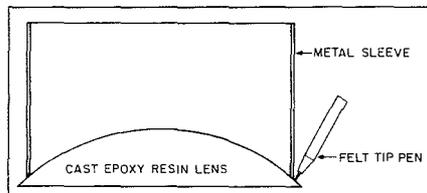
Marking the cast lens for edging. Note that the marking sleeve or cylinder must be perpendicular to this rear surface of the lens.
